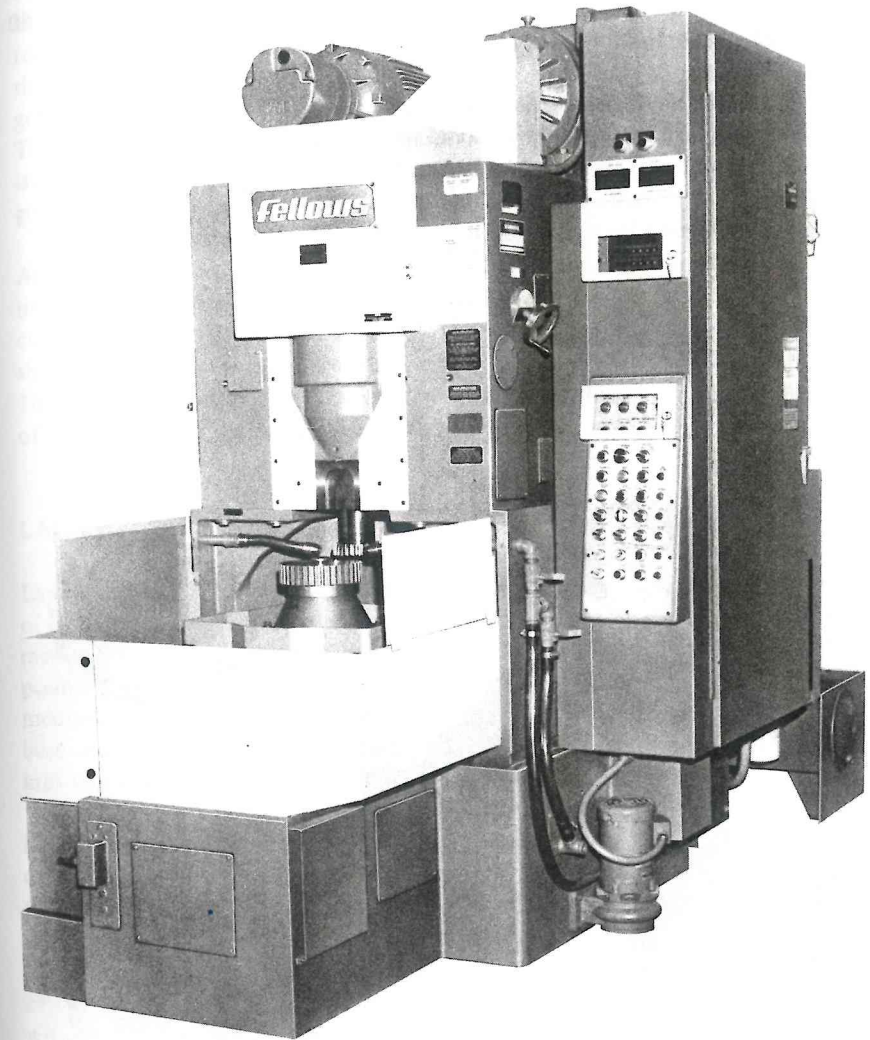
Shaper cutting machine. (Courtesy of Fellows Corporation, Springfield, Vt.)
